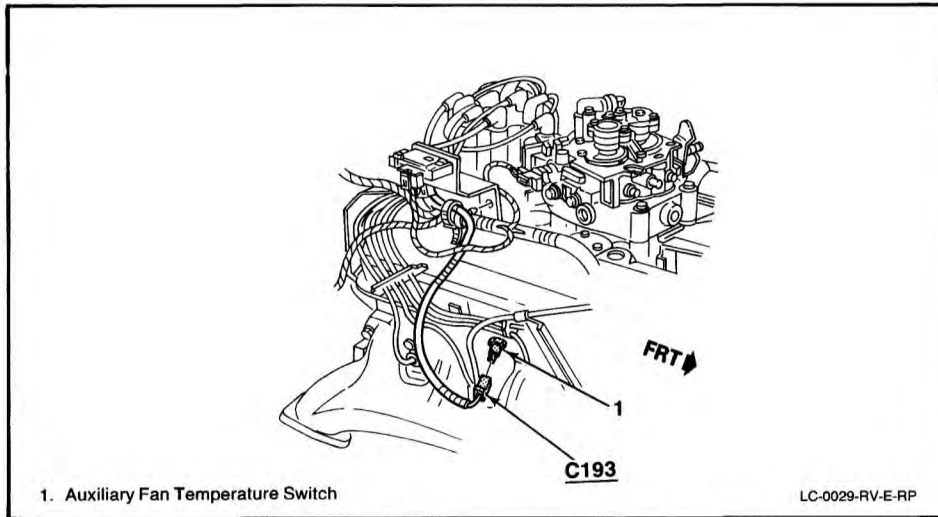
Auxiliary Cooling Fan Wiring Harness
